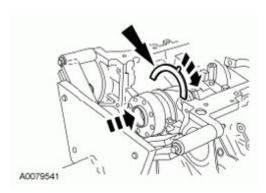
Installing Rear Crankshaft Upper Thrust Washer Courtesy of FORD MOTOR CO.
